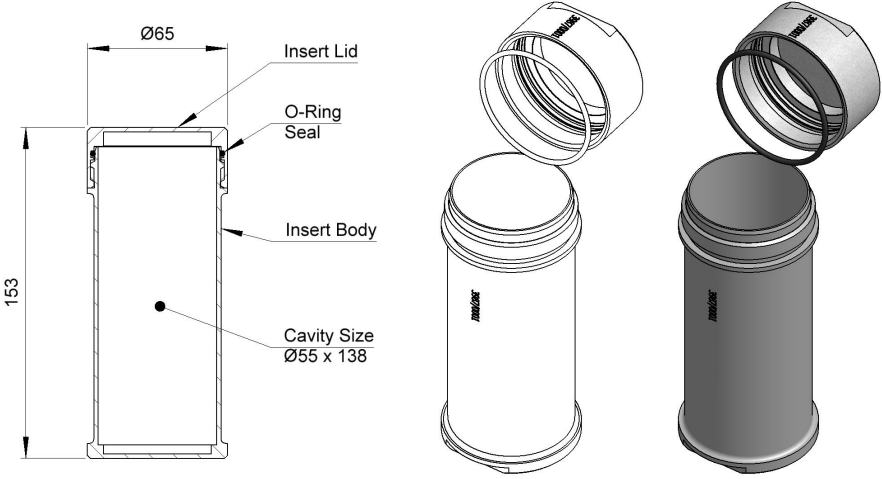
Shielding Insert HS - 55 x 138 - SS, Design No 3987
